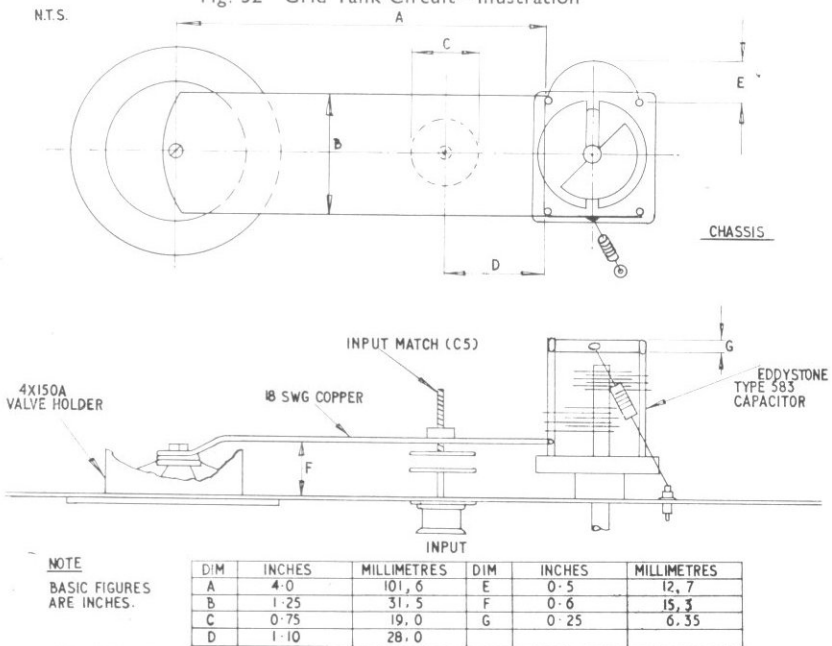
432 Mc/s Power Amplifier Grid Tank—Dimensional Drawing
